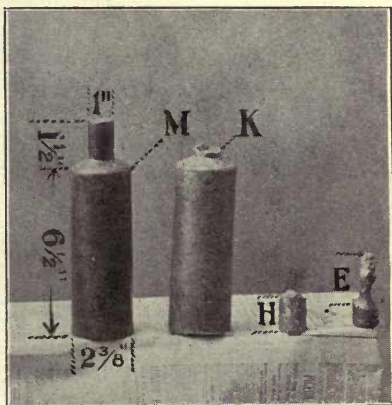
SHRINKAGE PATTERN AND TEST CASTING.
